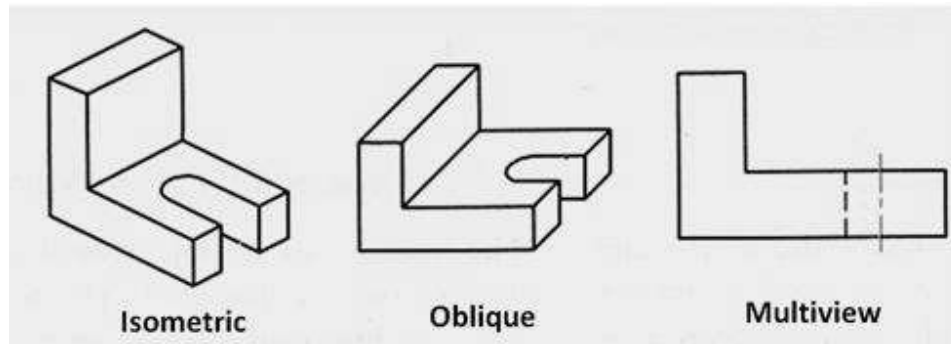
Orthographic projections of a solid showing isometric, oblique and multi-view drawings.
